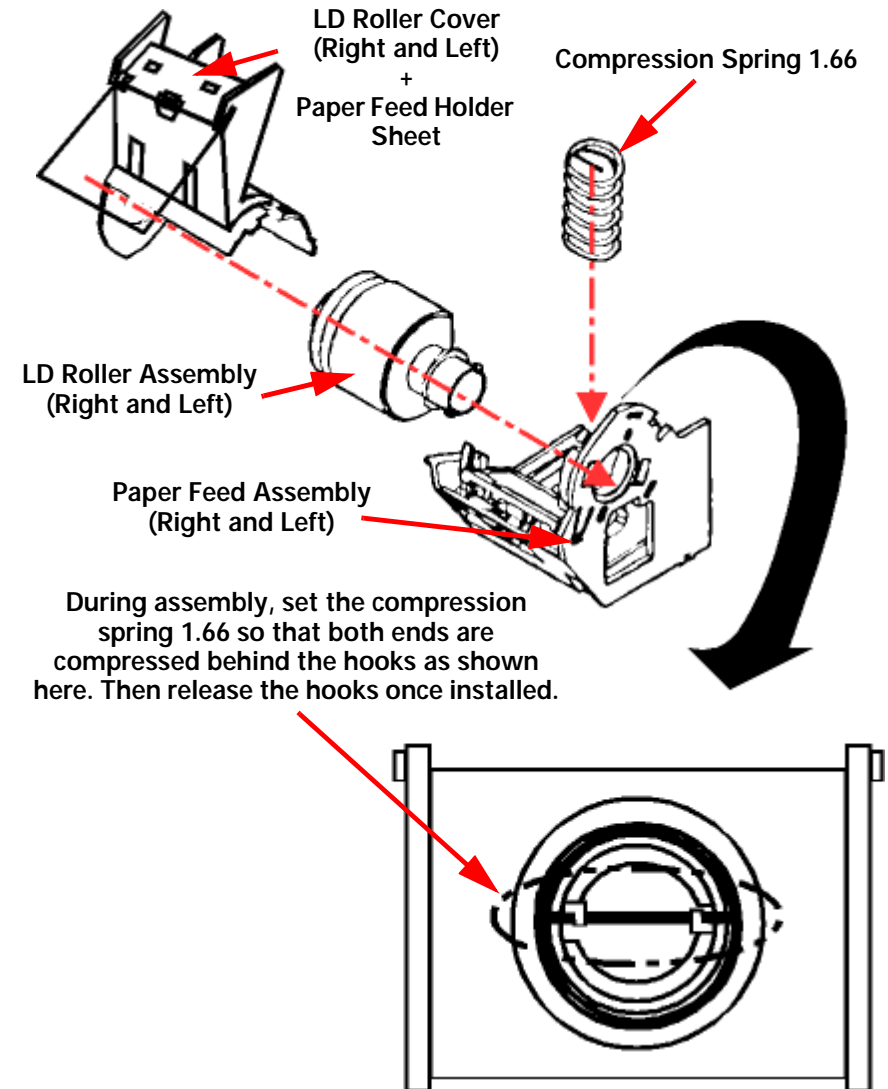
Disassembly of Paper Feed Roller Assembly
